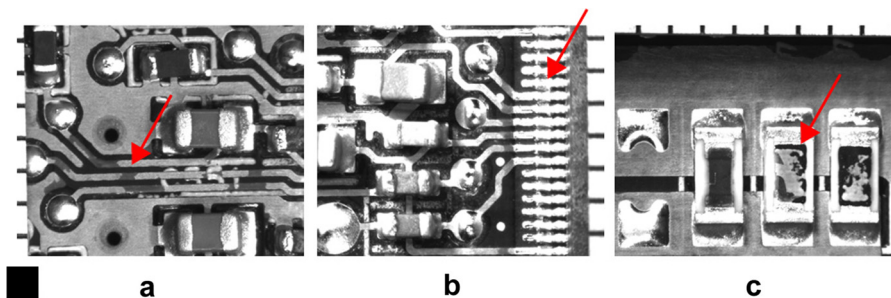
Optical microscope images of the laser striped PCB, the black scaling square at the bottom left has 1 mm sides. Arrows indicate: a) Stripping failures on thin parallel tracks; B) Processor soldering terminals and the solder itself were visually unharmed; c) Some components presented casing damages.
